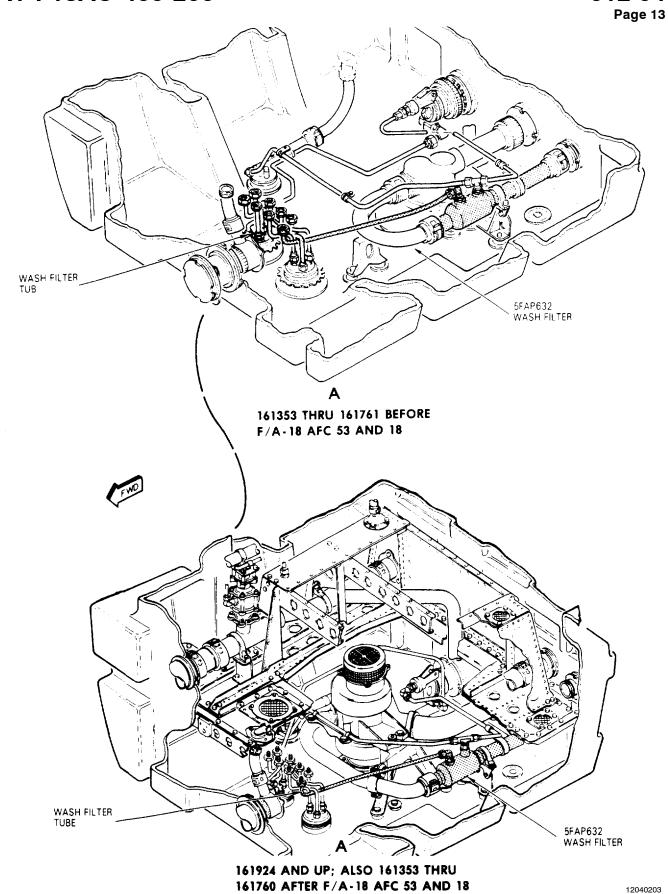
No. 2 Fuel Tank Cycle Test Troubleshooting Component Locator (Sheet 3)
